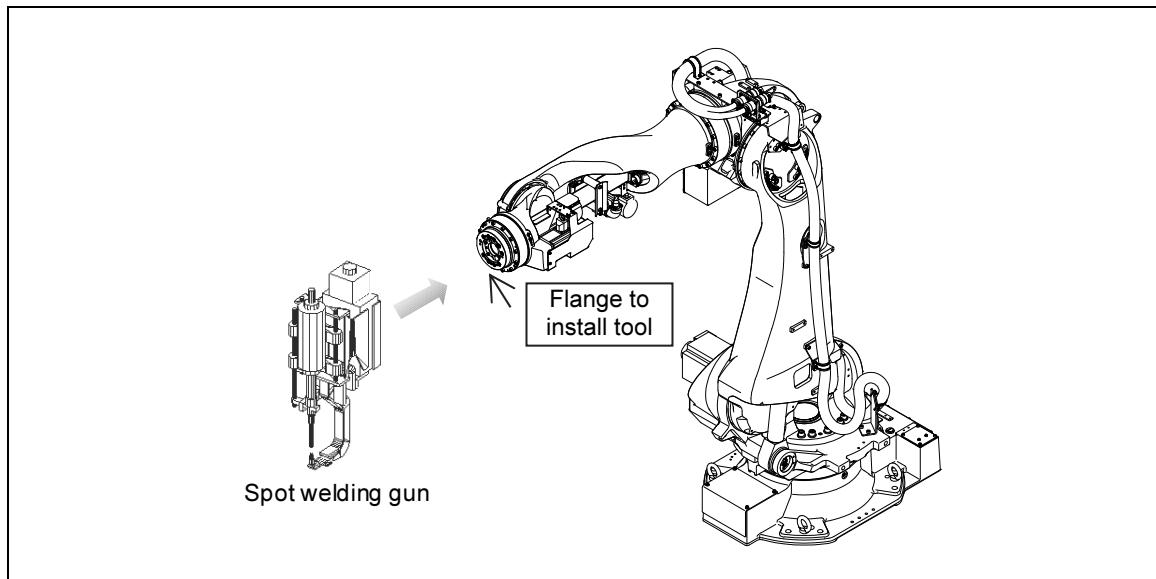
Installing a tool (Spot welding gun)
